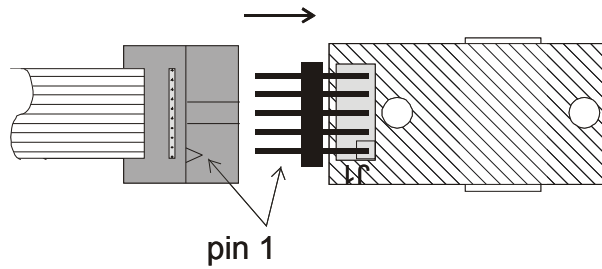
Attaching ribbon cable to Temperature Probe PCB
